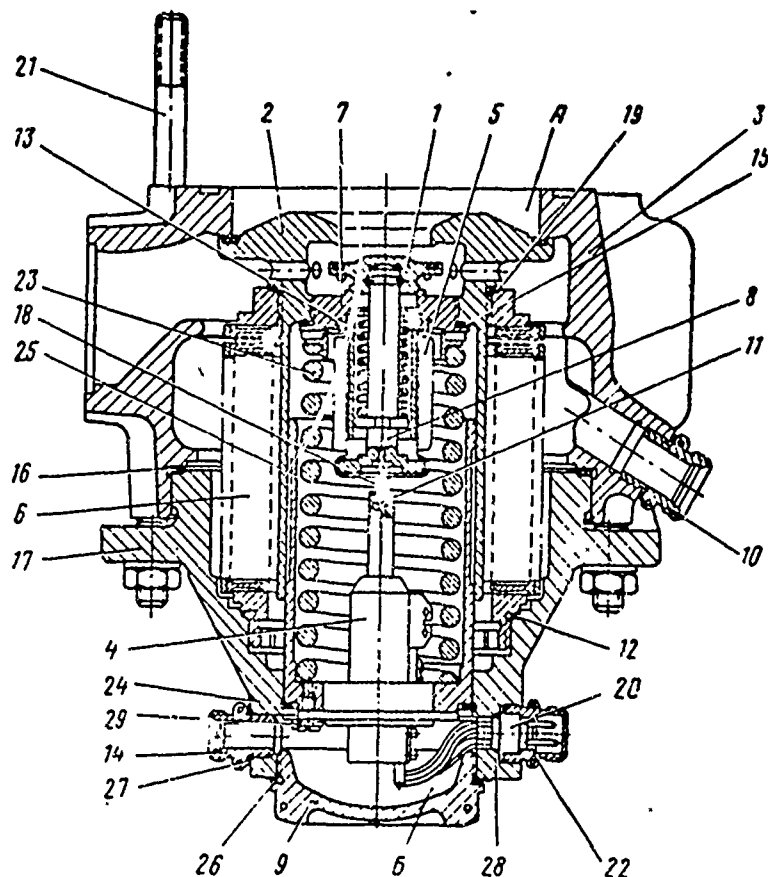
Main oxidizer valve: A - liquid cavity; 6 - controlling cavity; 1 - prestage valve; 2 - main valve; 3 - housing; 4 - switch; 5 - small bellows; 6 - main bellows; 7 - plug; 8 - rod; 9 - protective cap; 10, 14, 22 - connection tube; 11 - adjustment screw; 12, 15, 16, 19, 26, 27, 28 - seals; 13 - small spring; 17 - cover; 18 - spring of switch; 20 - block; 21 - pin; 23 - spring; 24 - stop ring; 25 - bushing; 28 - base; 29 - screw.
